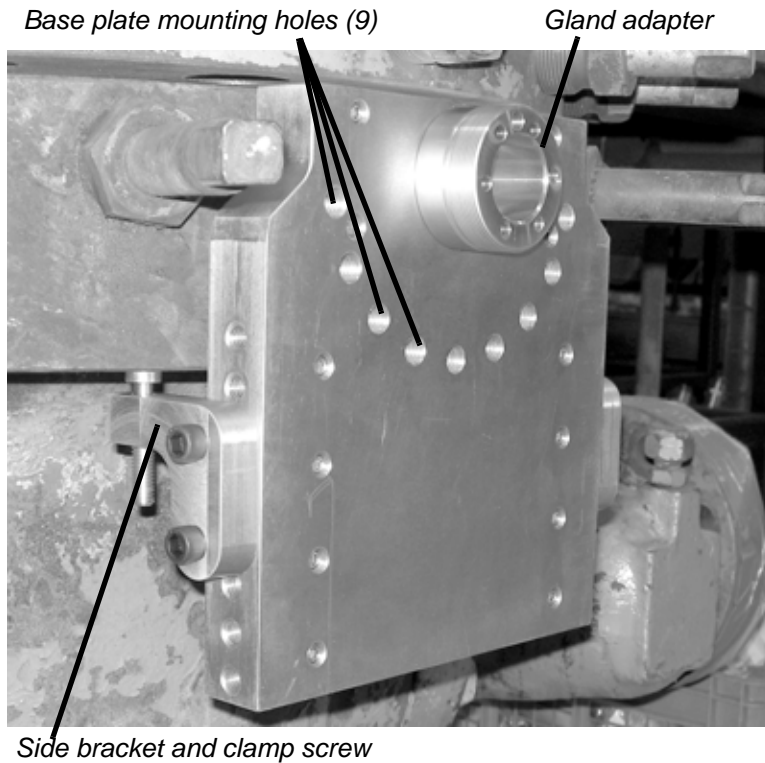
The photo illustrates the adapter saddle. The side bracket can be moved to the appropriate position for the spool you are drilling.
